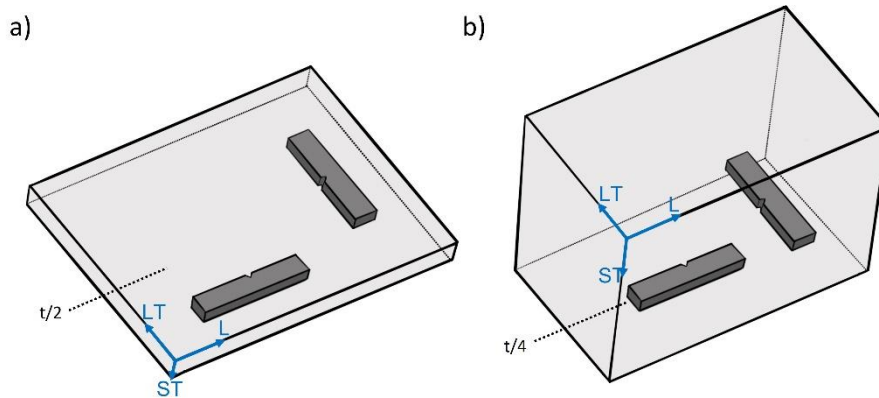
Schematic drawings showing the locations and orientations of Charpy impact samples extracted from a) 20 and b) 130 mm thick plate.
